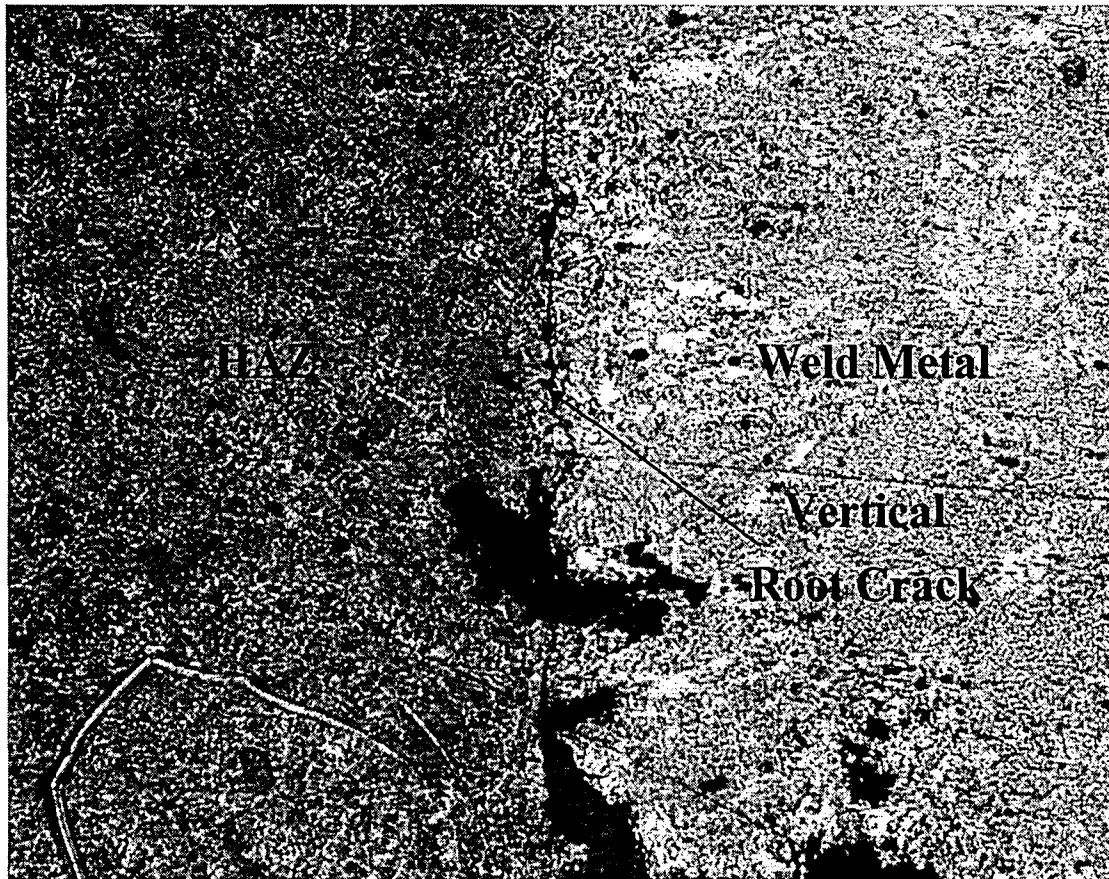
Vertical Root Crack-Specimen 36-7, Bottom-right Section
